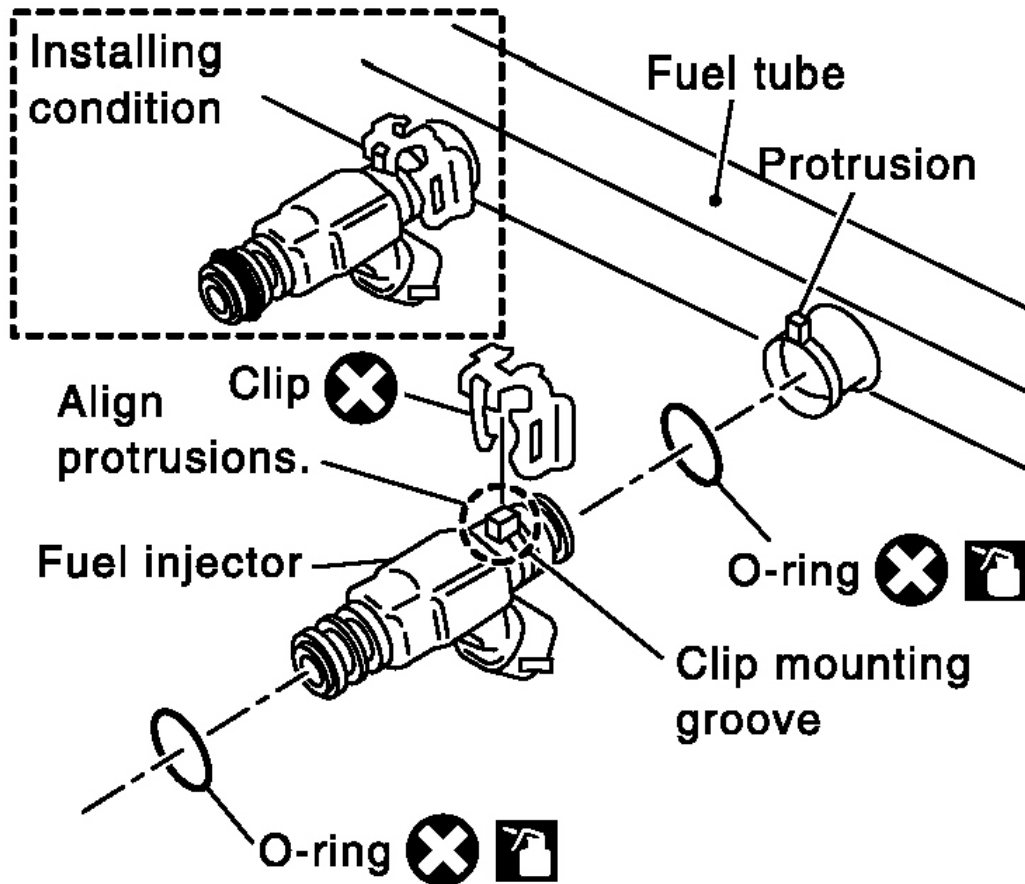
Identifying Fuel Tube And Fuel Injector By Loosening Mounting Bolts
